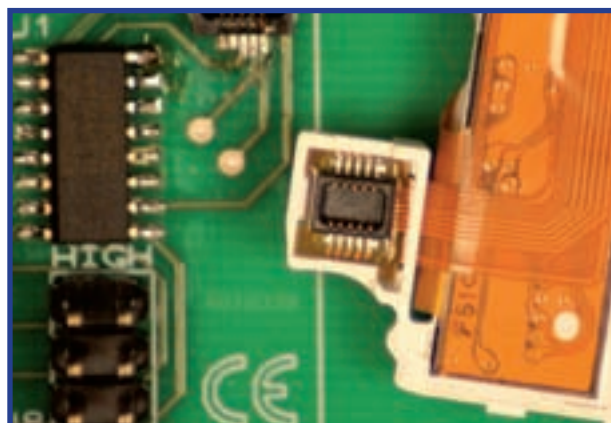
Close up of the original prototype PCB with display surface mount ‘plug’ and ‘socket’.
